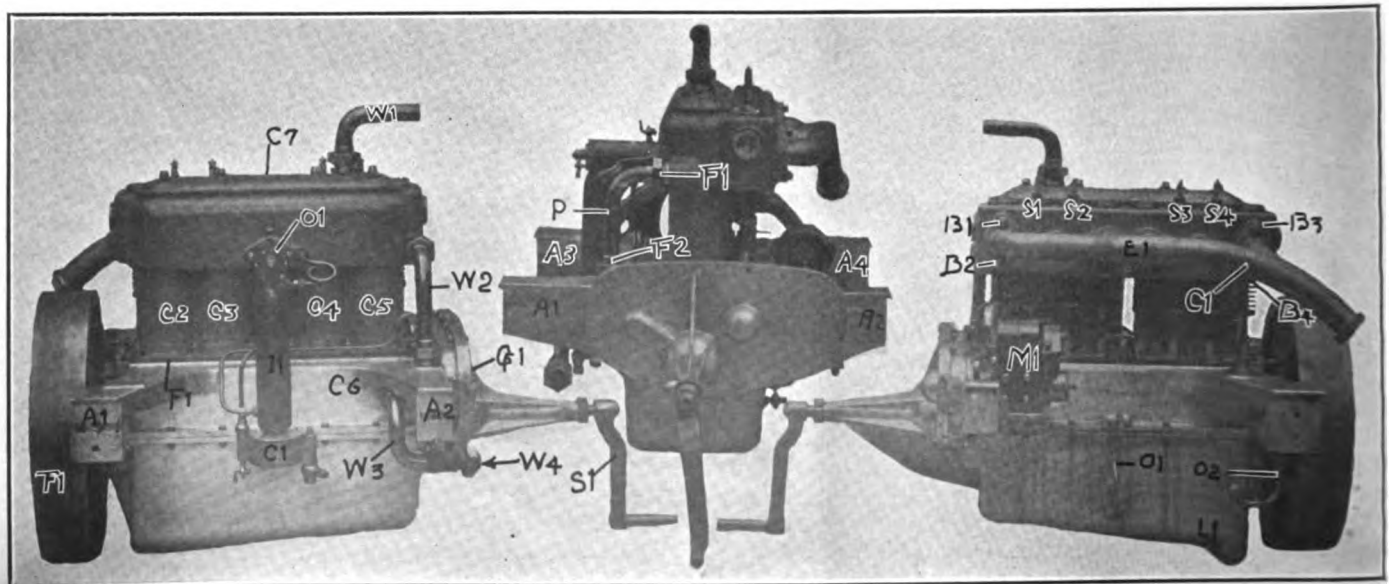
Carbureter side of the motor Fig. 2—Front elevation in slight perspective Fig. 3—Magneto side of the motor
